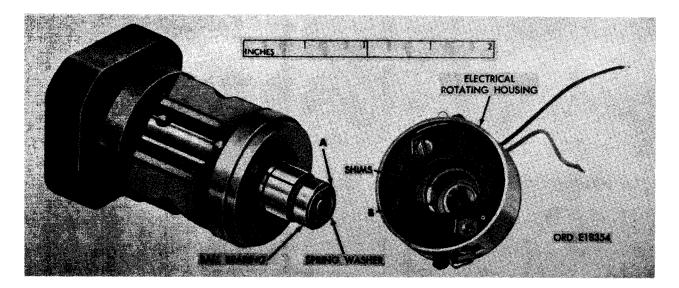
REMOVING SPRING WASHER AND SHIMS.
